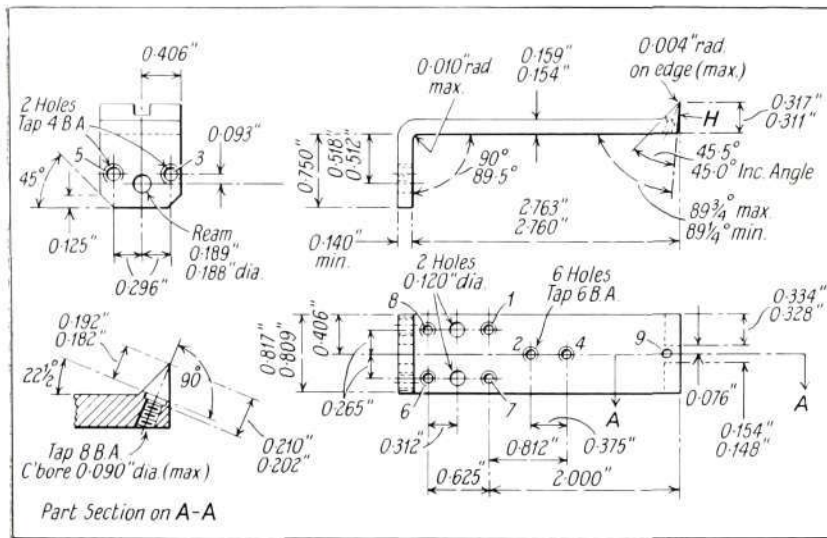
Three views and a part-section of the relay yoke, showing the principal dimensions and the tolerances which are specified
